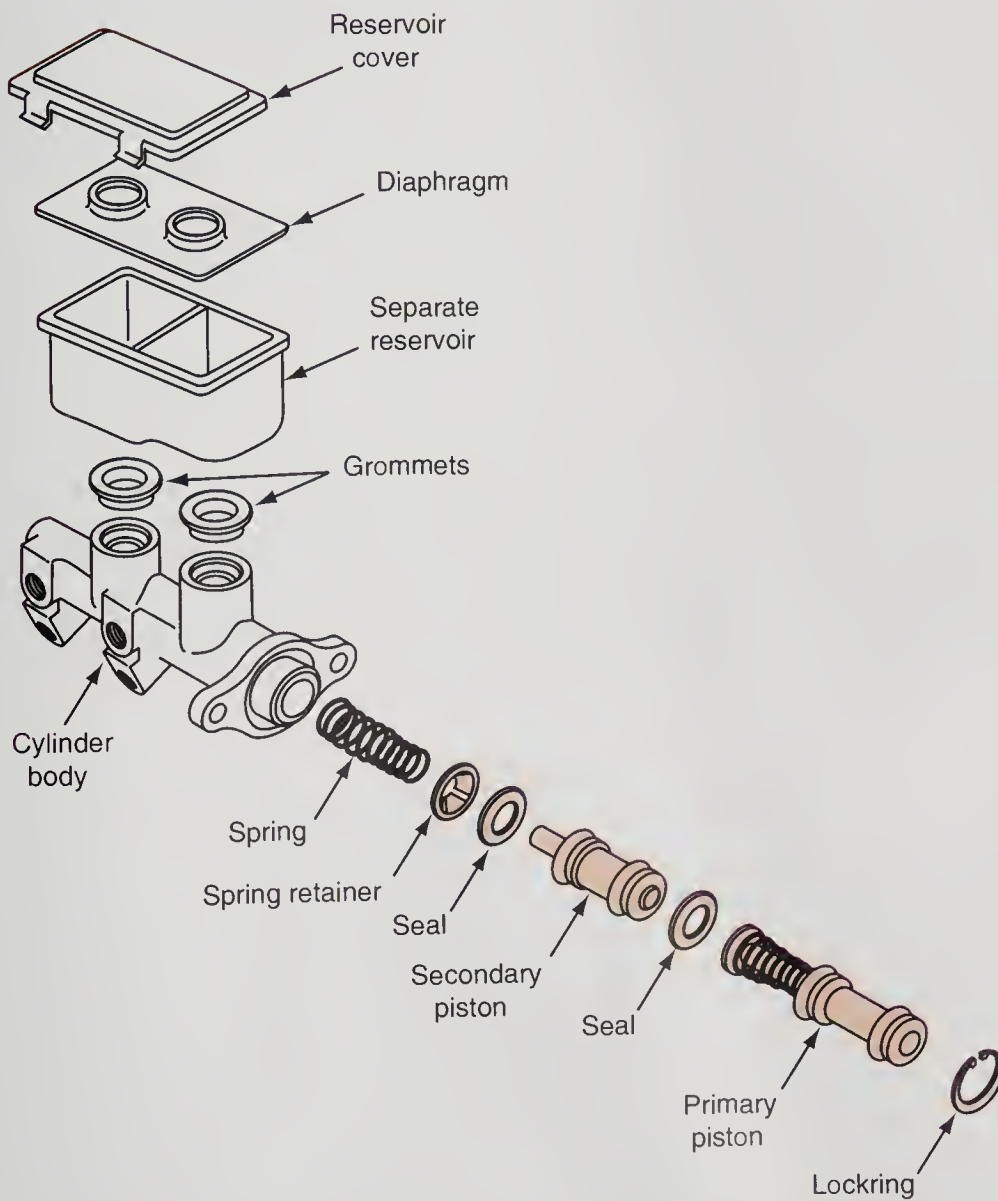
Note how the two pistons and related components slide into the master cylinder bore. The primary piston will be the one closest to the driver and will serve the front wheels in most cases.
